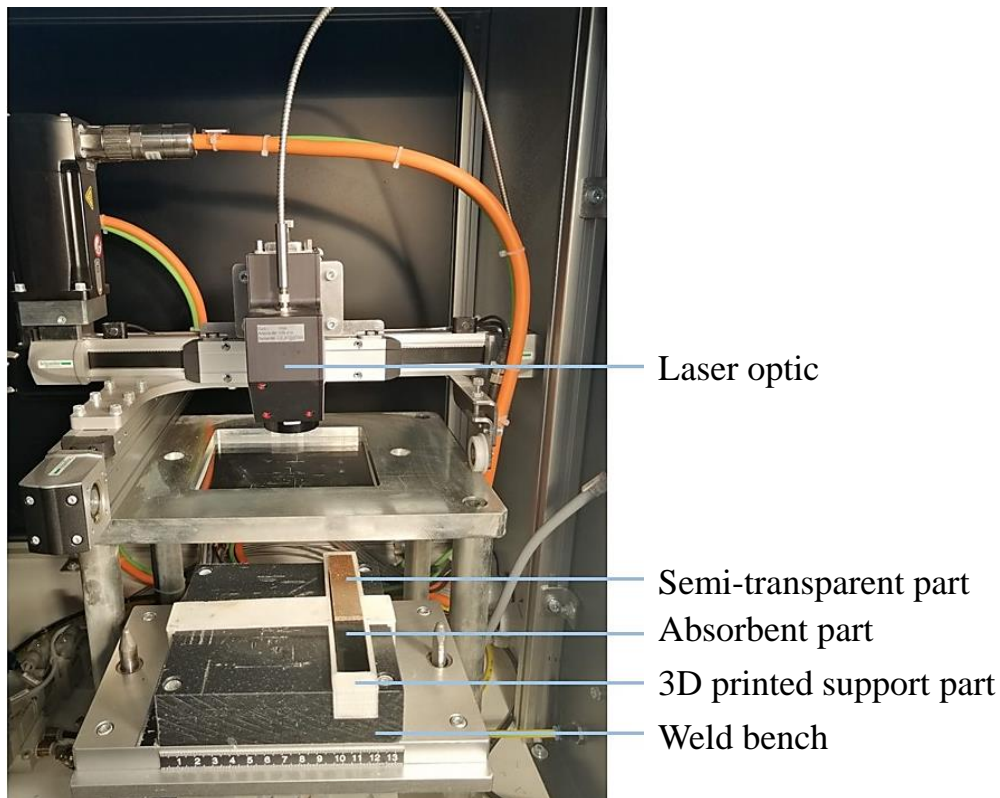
Laser welding setup at IMT Nord Europe
